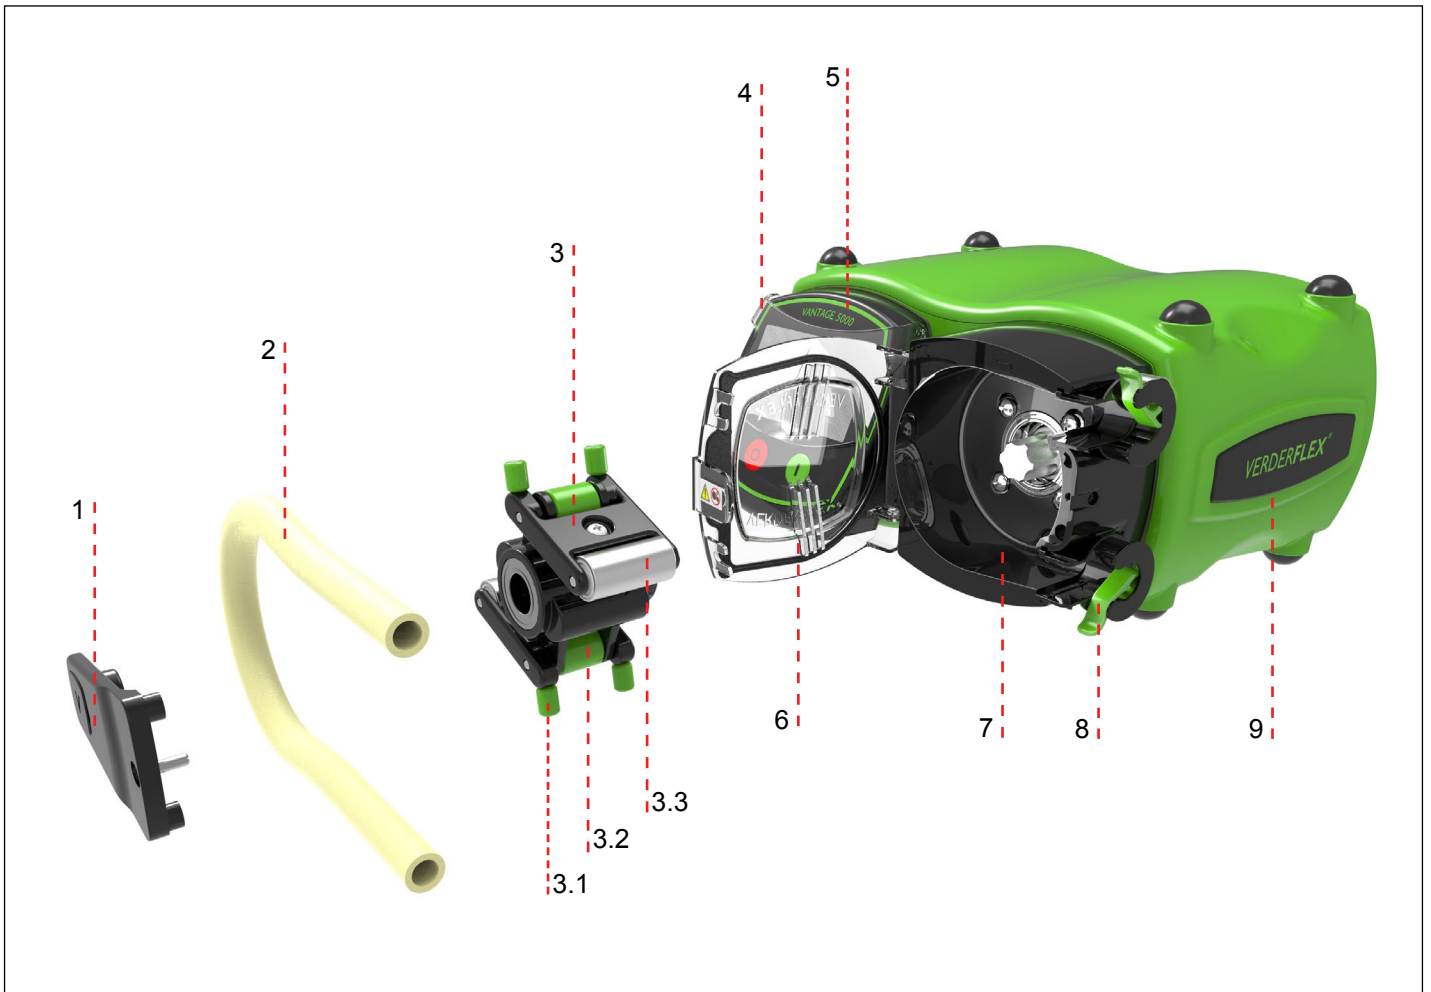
Vantage 5000 Exploded View - Continuous Tube
